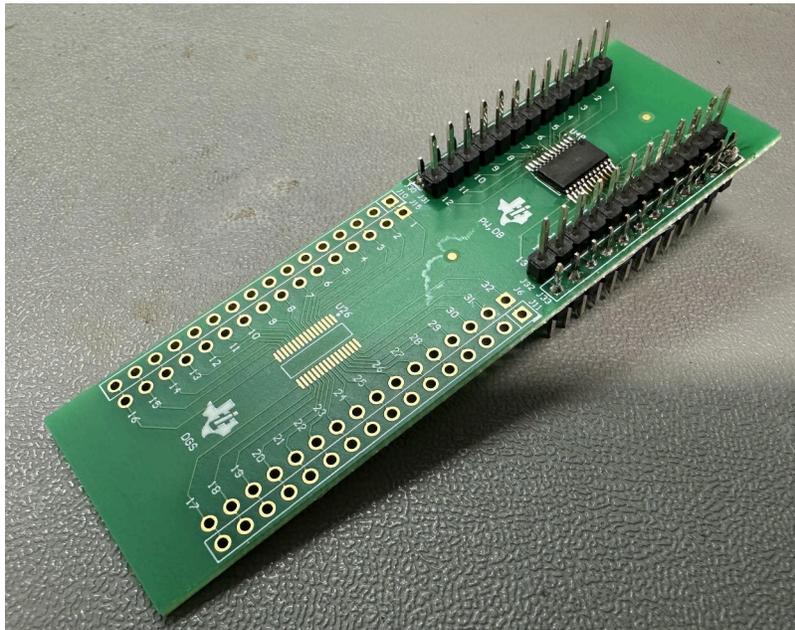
Example Breakout Board with IC and Headers Soldered
